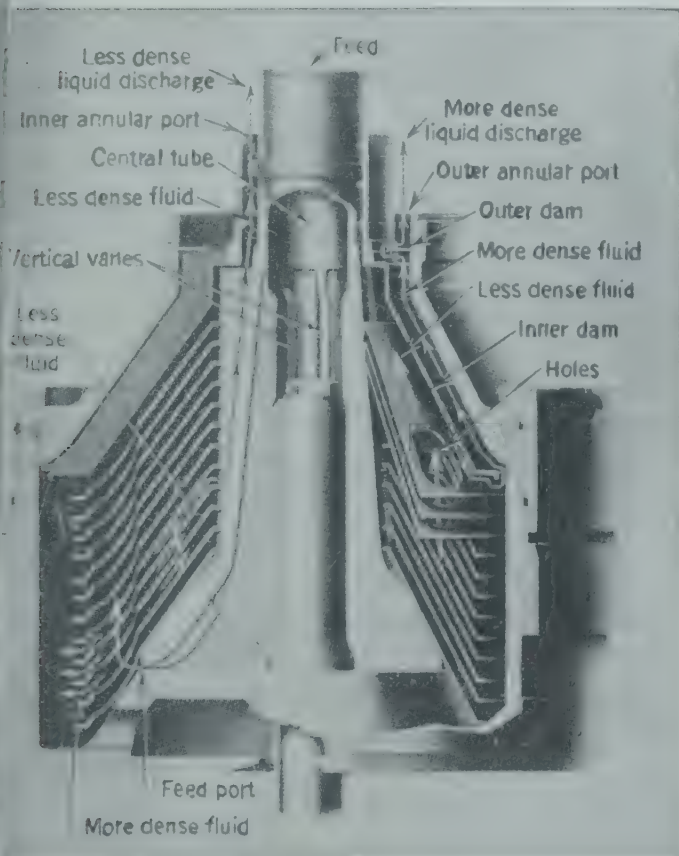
Cutaway view of disk-bowl centrifuge with nozzle discharge for handling solids. (De Laval Separator Co.)
